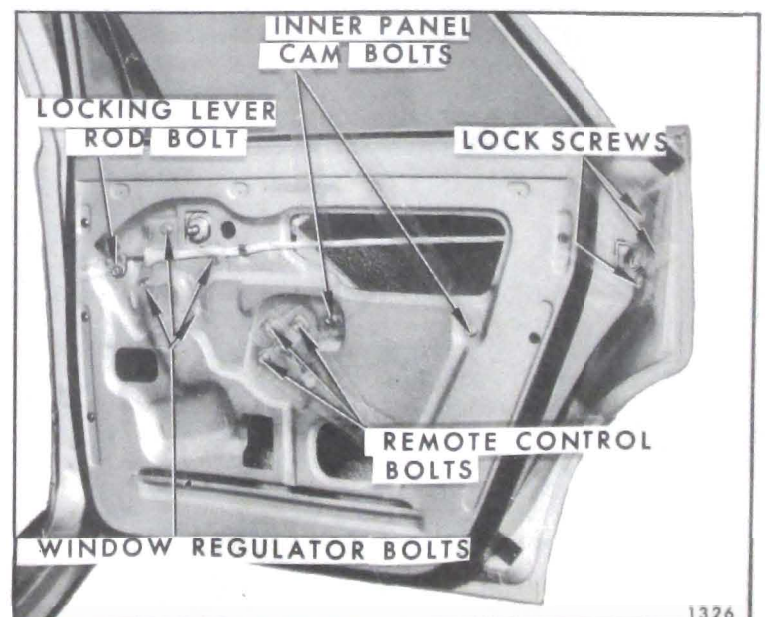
Rear Door Hardware - "A" Styles Shown
